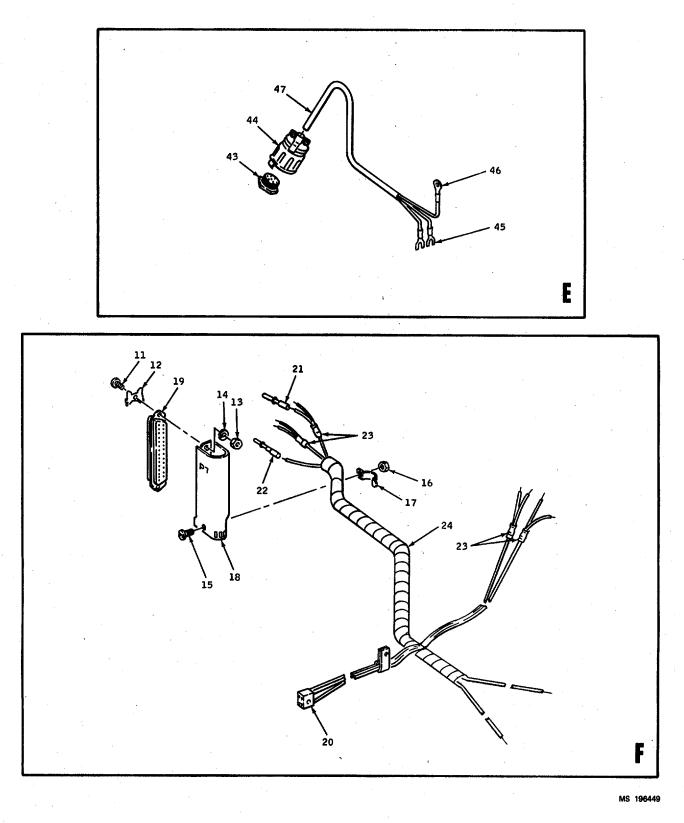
Printer Chassis Electrical and Base Mounting Components, Exploded View (Sheet 3 of 3)
